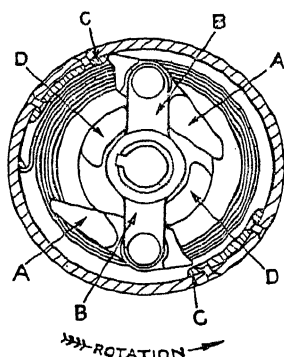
Section through B.T.H. type Z impulse starter. A, pawls; B, hub member arms; C, stops on magneto end plate; D, arms on driving member.
